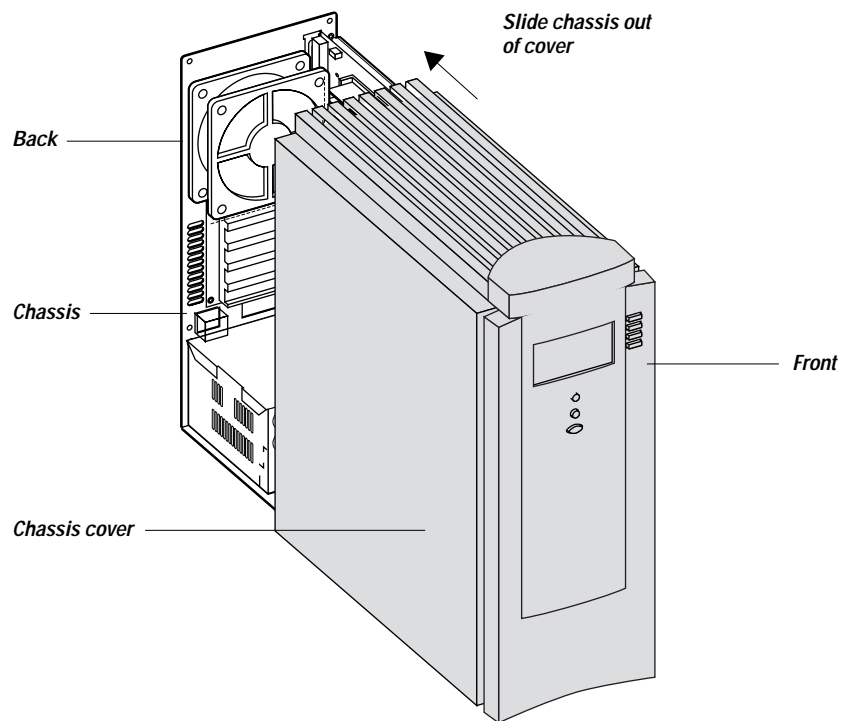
Removing the Fiery XJ BP100 chassis cover
